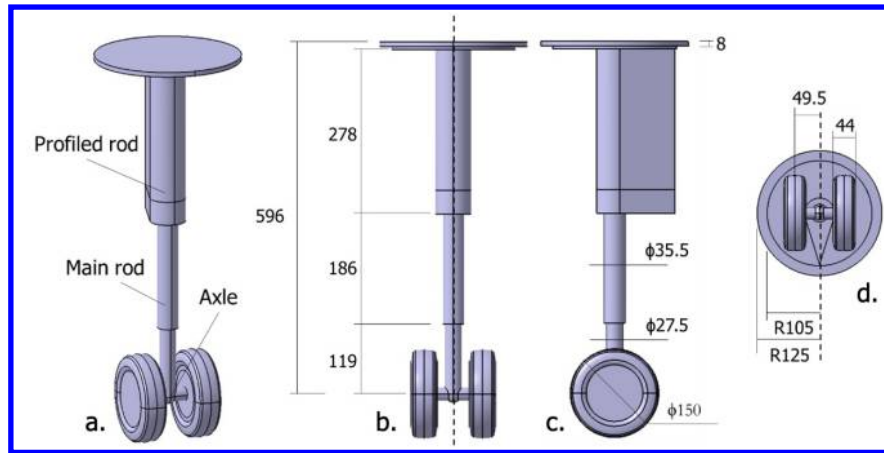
Sketch of the LAGOON-SLG model in baseline configuration without brakes and torque-link (shown below). Distances in mm. (a) Isometric view (b) Front view (c) Side view (d) Bottom view.
